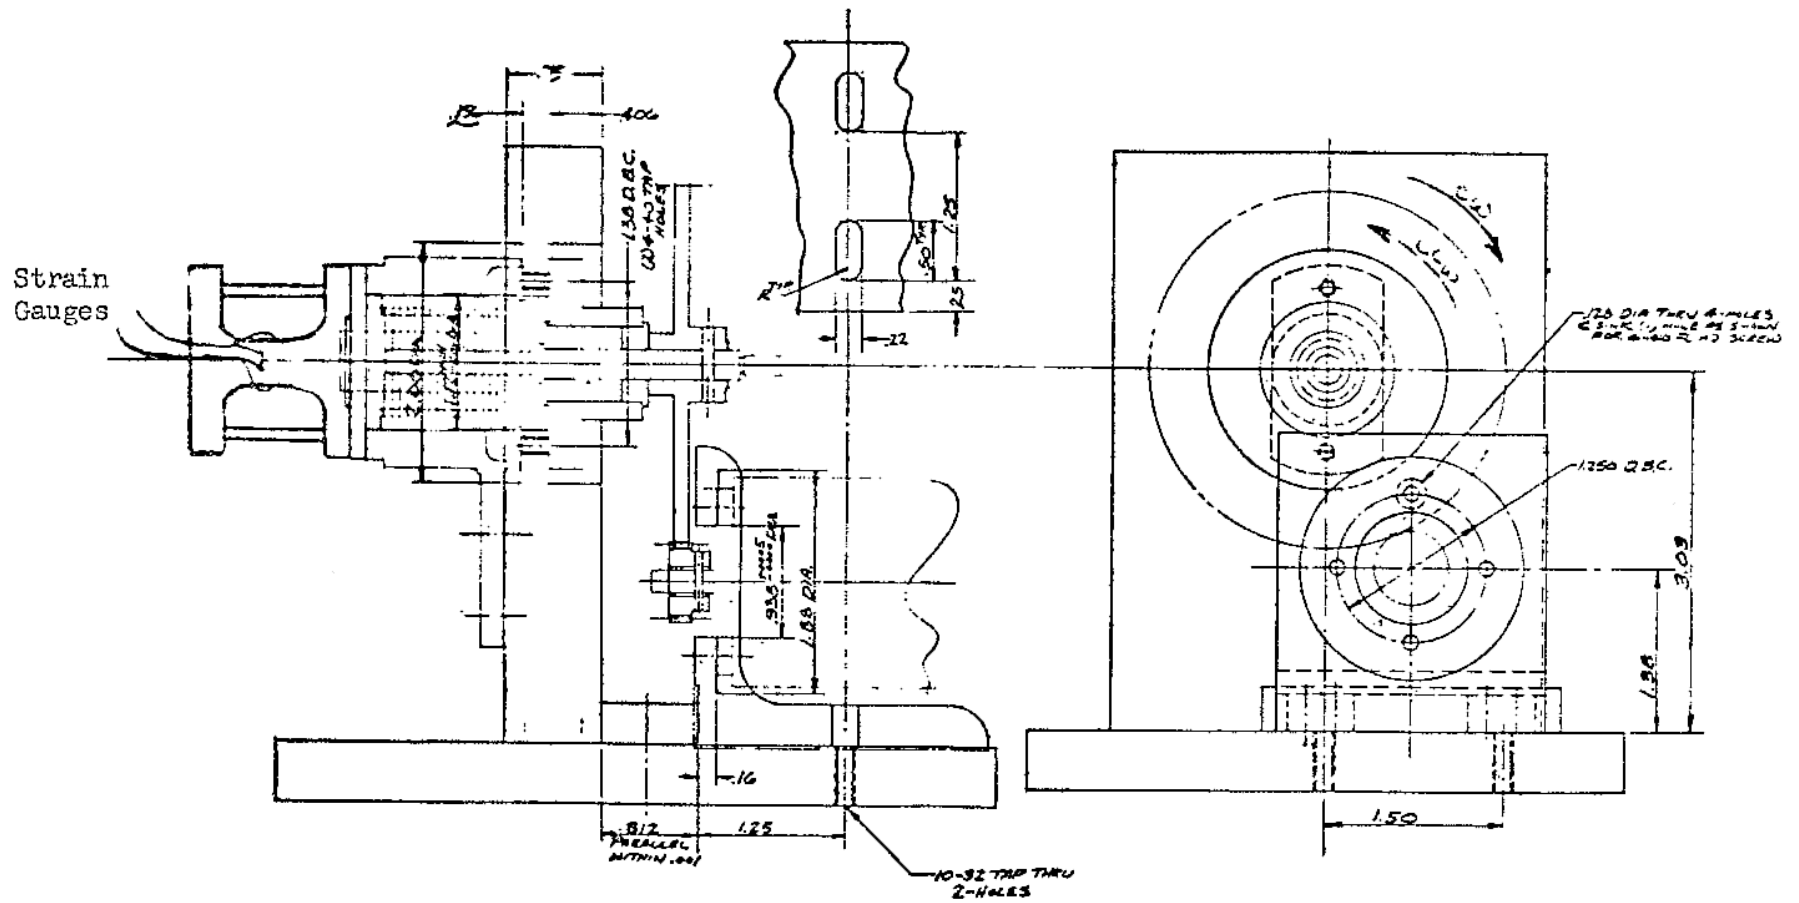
Torque Test Fixture and Test Setups - Elevation Drive
